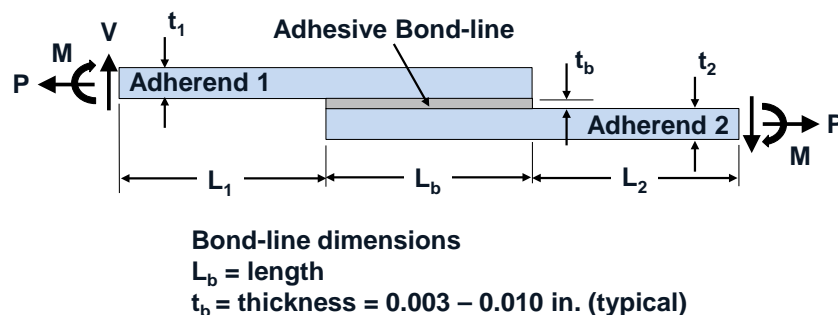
Adhesively Bonded Single Lap Shear Joint (Unsupported).
